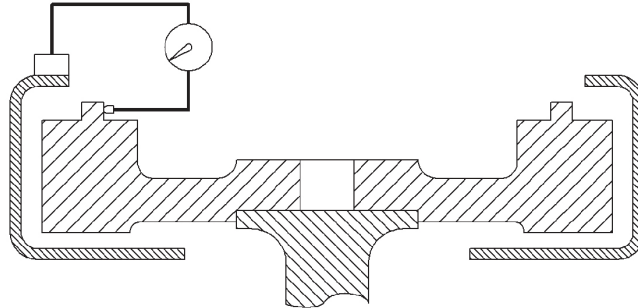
Checking the Flywheel Pilot Ring Bore Eccentricity
